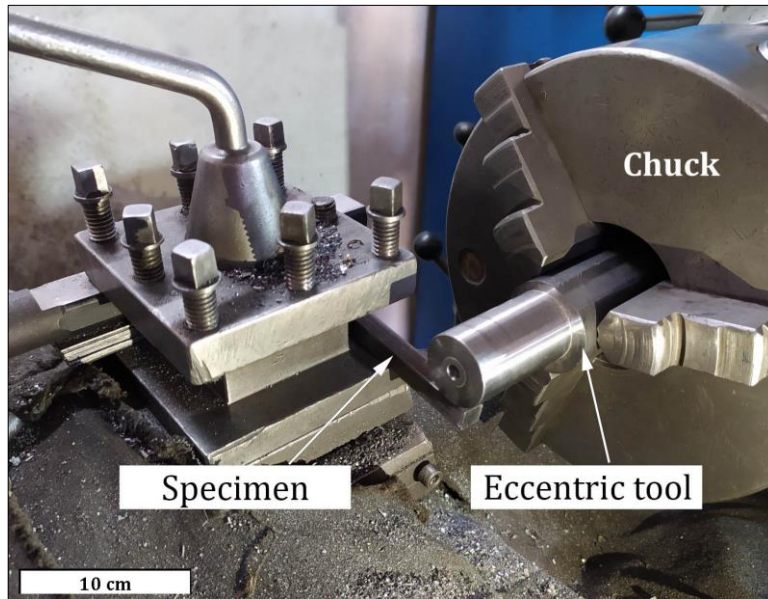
The initial position of the tool and specimen to maintain constant contact with the eccentric tool at each stage
